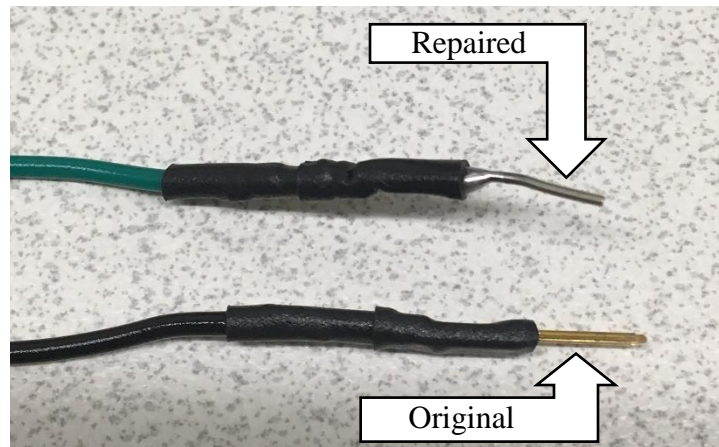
Example of a repaired pin on a DB9 breakout compared to an original pin. A jumper wire was directly soldered to where the pin broke off.
